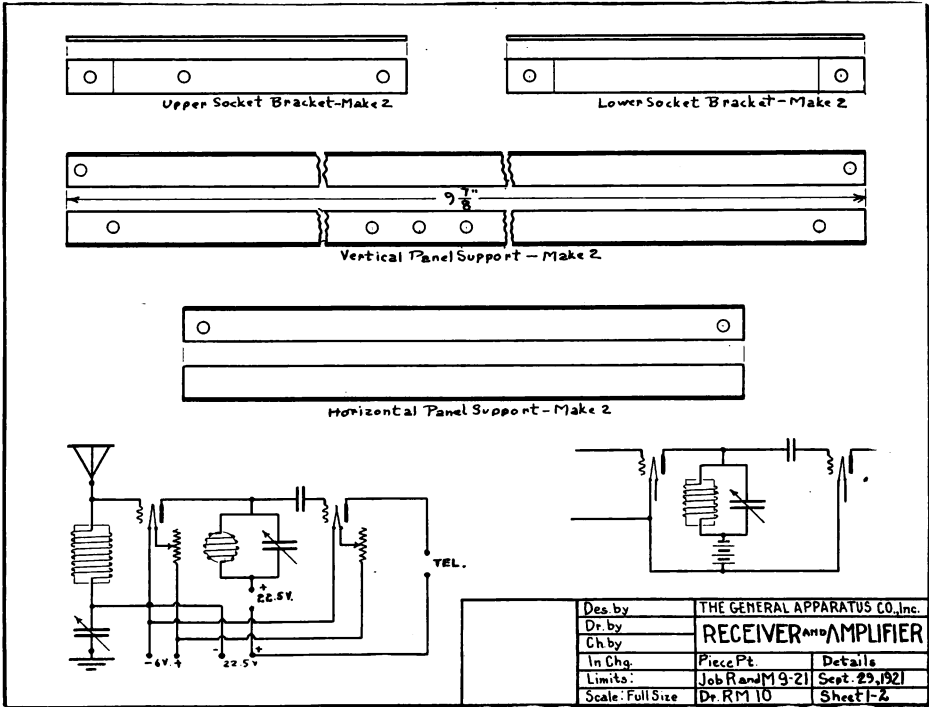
One-half scale. Circuit details and scale drawings of the support frames.
